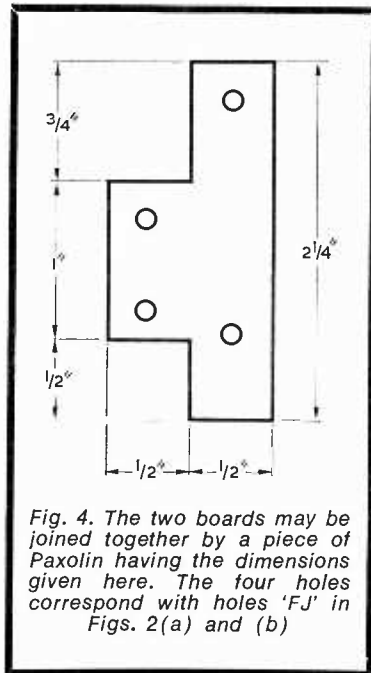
The two boards may be joined together by a piece of Paxolin having the dimensions given here. The four holes correspond with holes 'FJ' in Figs. 2(a) and (b)
